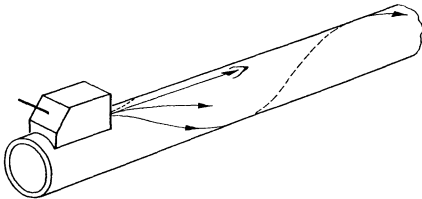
Longitudinal test on pipes for laps and transverse cracks using zigzag waves (only the path of the wave on the pipe surface is shown)
